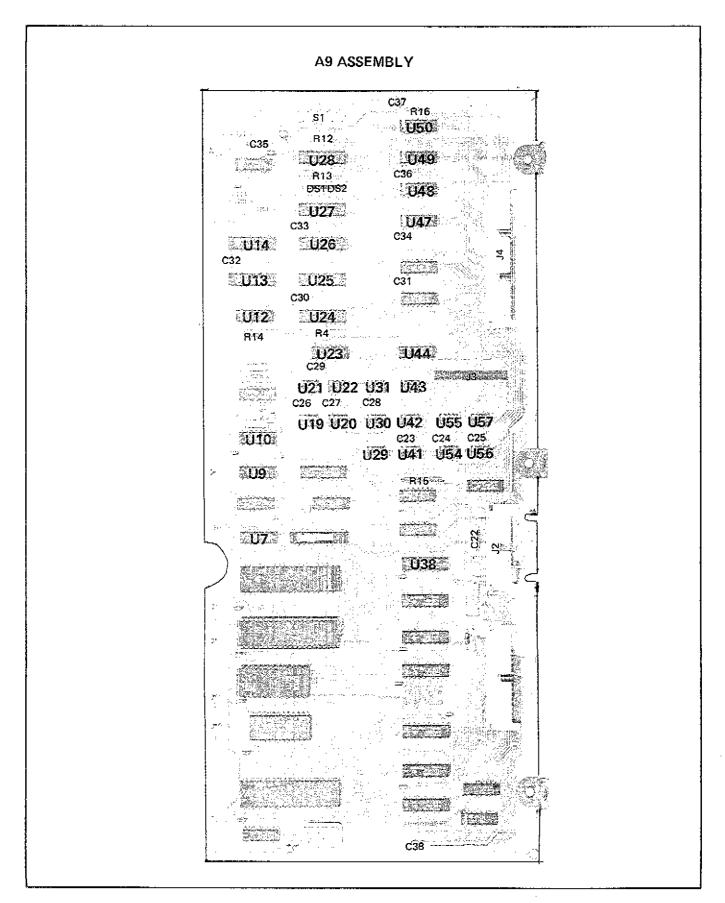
P/O Microprocessor Board Assembly Component Locations (P/O Change D)
